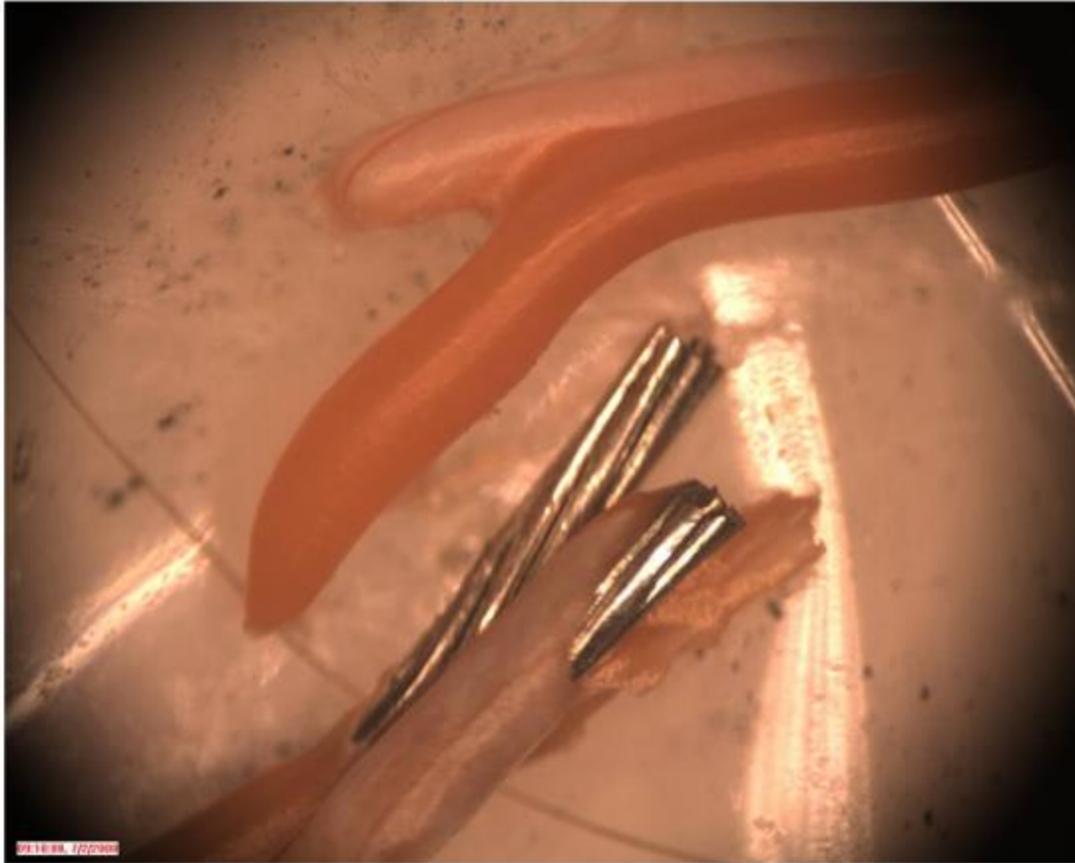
ABOVE IS A PICTURE OF A BONDED PAIR THAT WAS PART OF A 4 PAIR "INDUSTRIAL" ETHERNET CABLE. THIS CABLE WAS FLEXED TO THE POINT OF FAILURE USING THE QUABBIN ROLLING BEND FLEX FIXTURE. TEST PARAMETERS FOLLOWED THE SAME TEST SET UP AS USED TO SUCCESSFULLY QUALIFY QUABBIN'S UNBONDED INDUSTRIAL ETHERNET CABLE FOR 10 MILLION FLEX CYCLES. THE BONDED PAIR FAILED AT SOME POINT PRIOR TO 600,000 CYCLES. TO LEARN MORE ABOUT THE QUABBIN INDUSTRIAL ETHERNET CABLE AND THE VIGOROUS TESTING IT GOES THROUGH PLEASE REVIEW THE CORRESPONDING, ROLLING BEND FLEX TEST
